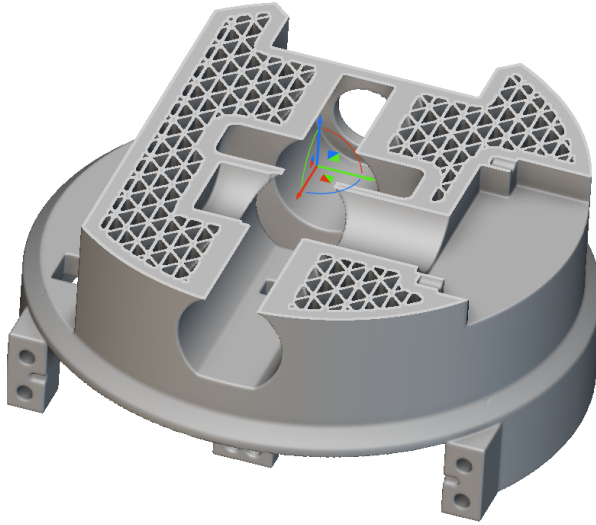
Section view of model showing a triangular honeycomb shape infill pattern
